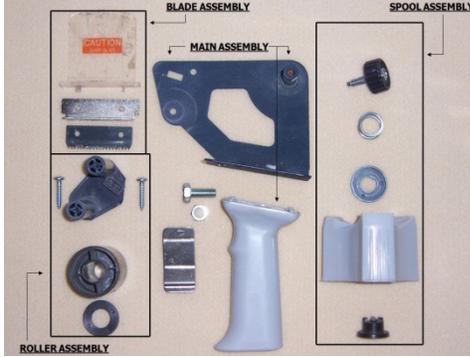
Exploded Assembly Diagram - Tape Dispenser
